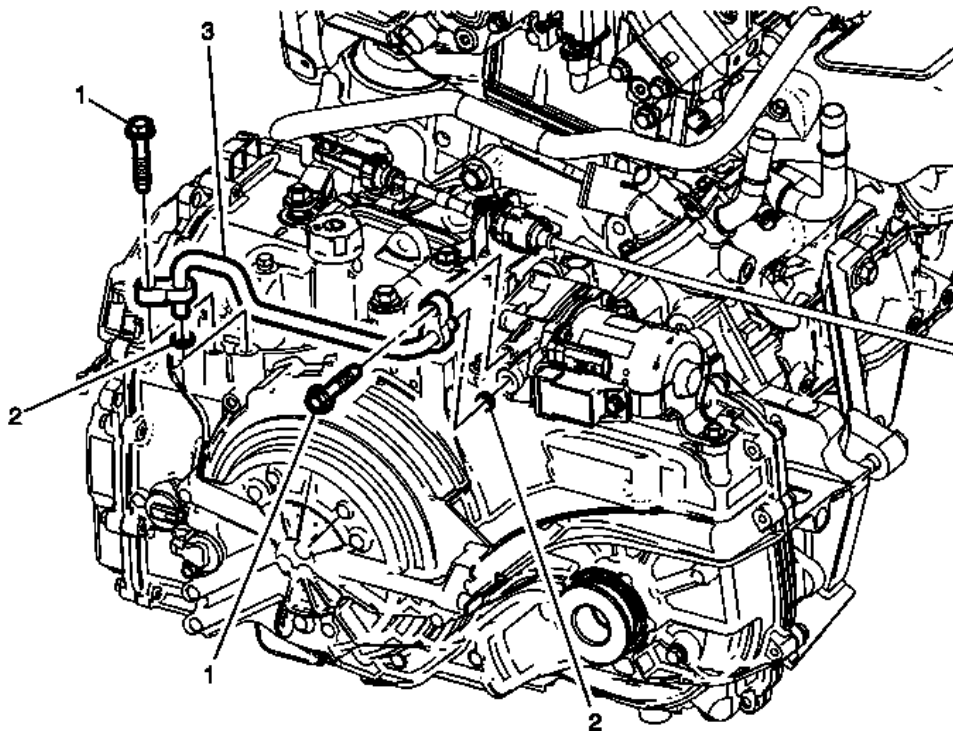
Auxiliary Fluid Pump Outlet Pipe, Seals & Bolts
